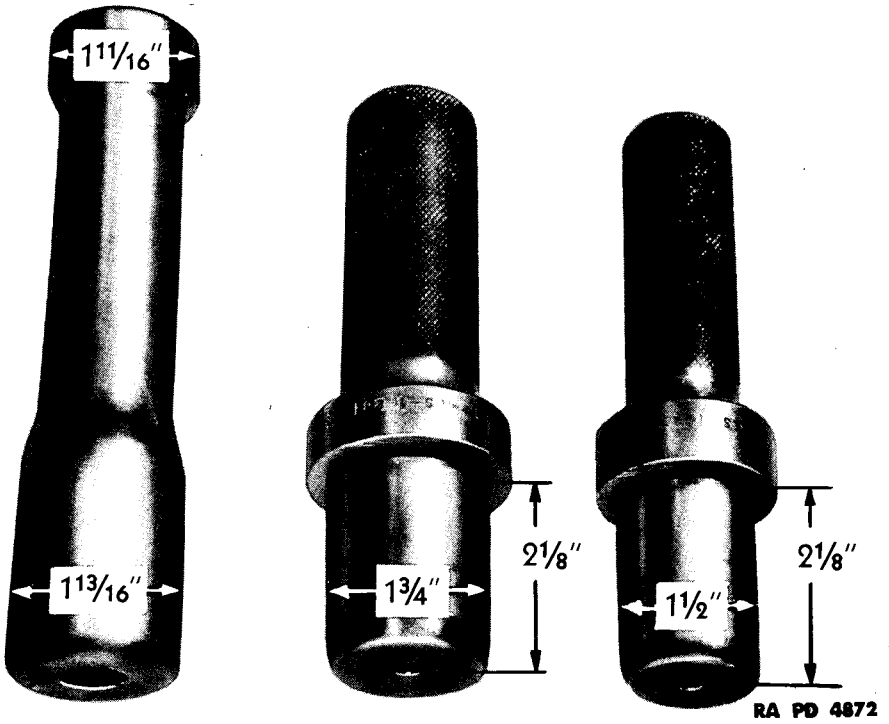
NEEDLE BEARING REMOVER AND NEEDLE BEARING DRIVERS
